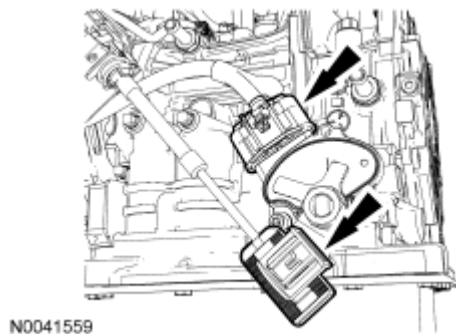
Locating Transmission Range (TR) Sensor Electrical Connector And Selector Lever Cable End
